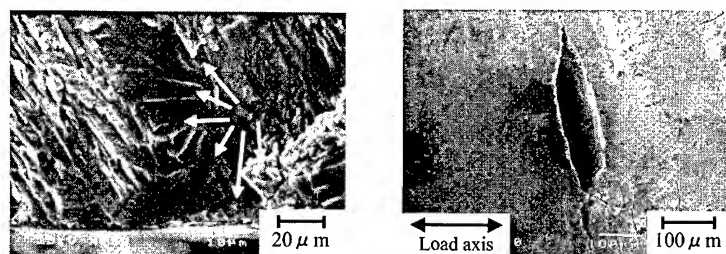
Fracture surface near the fracture origin and surface mesocracks of TiAlN/10 μ m
